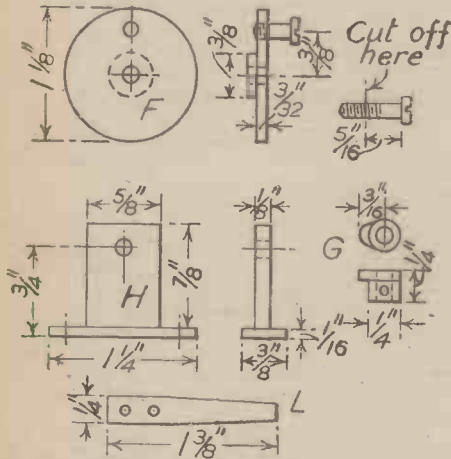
Crank-disc, bearings, contact-cam and spring.
